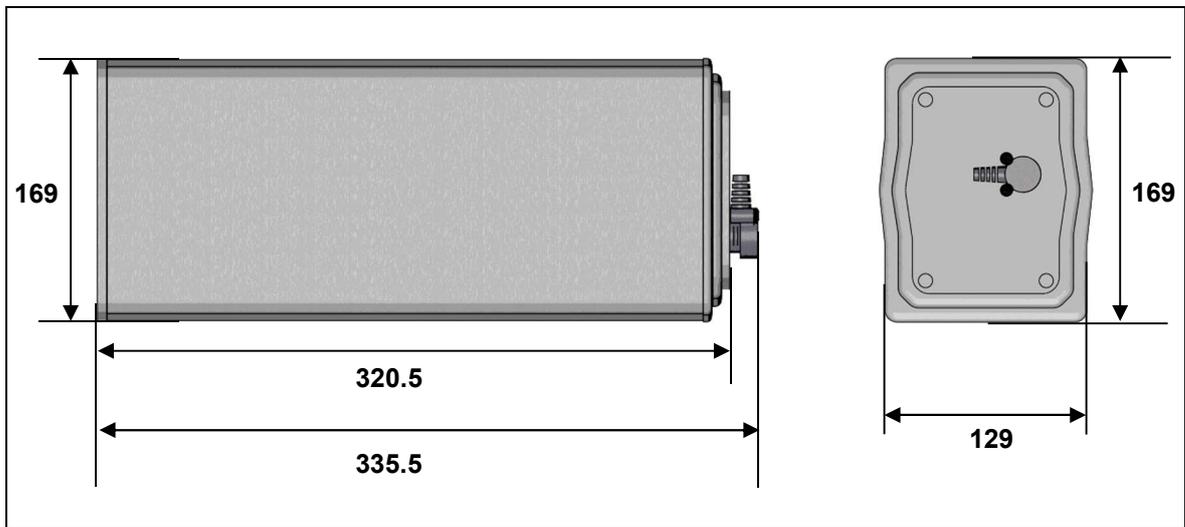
Dimensions of DC20 lifting column drive (in mm), minimum installation dimensions: 320.5 mm
